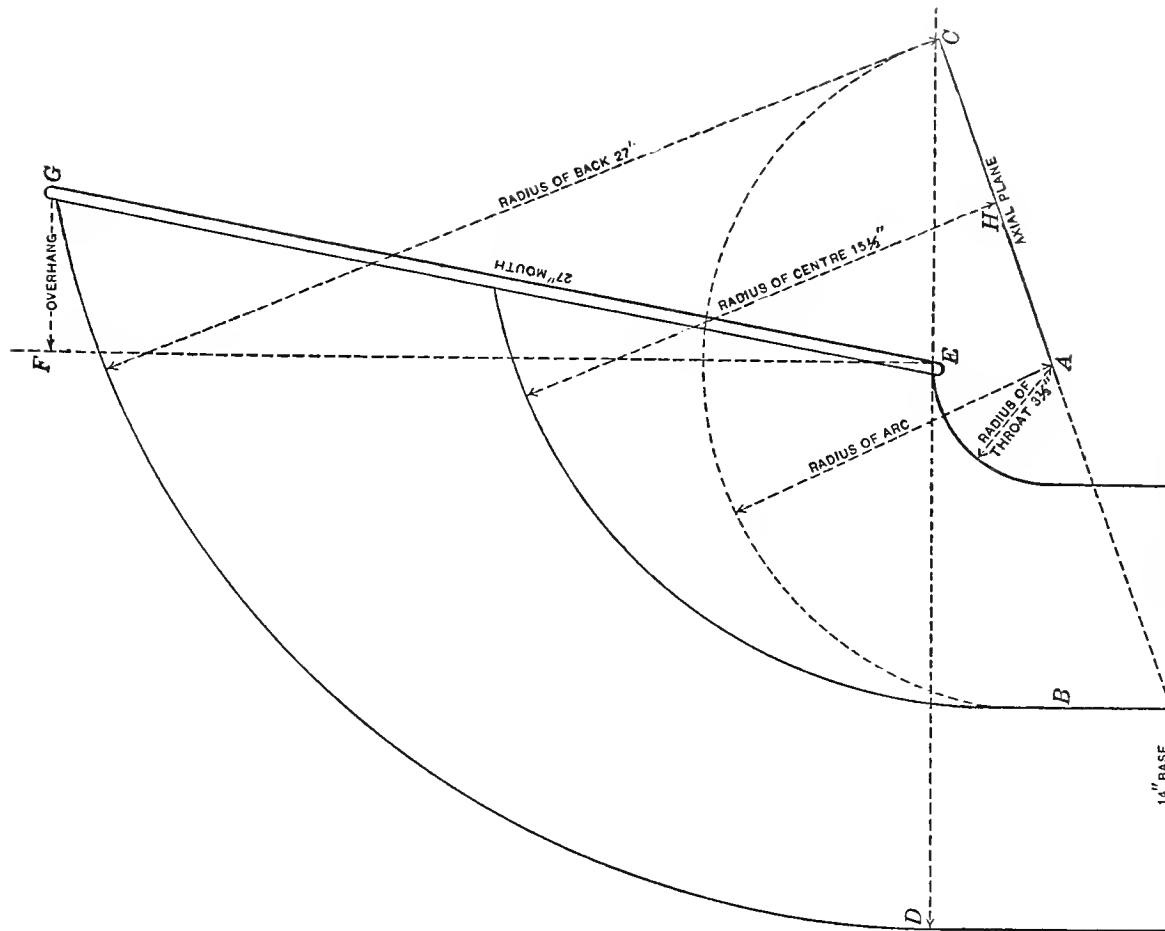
SIDE VIEW OF COWL, SHOWING METHOD OF OBTAINING THE SIDE PATTERNS.
